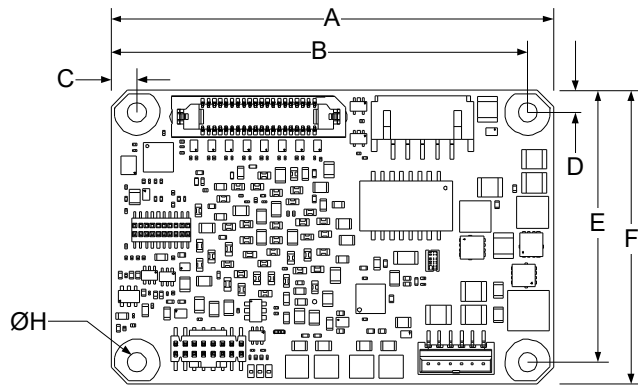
XETK-S23.0 Dimensions - Top View
